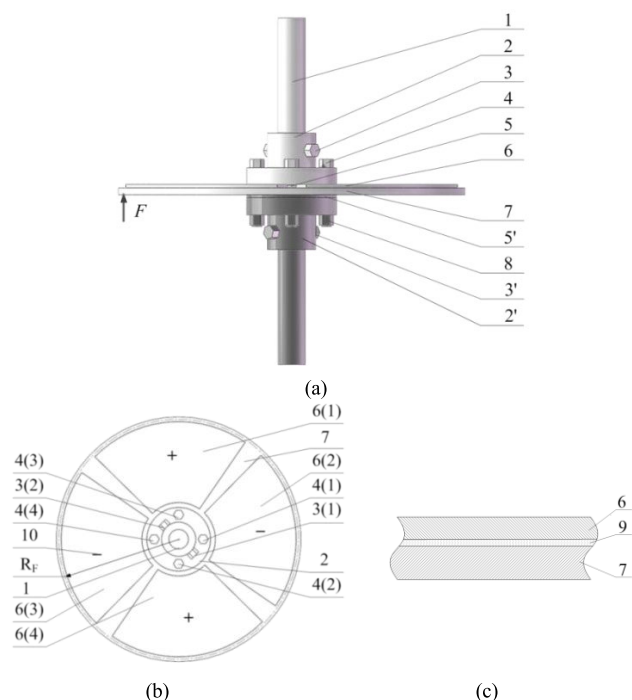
Front view (a), top view (b) and partial-cutaway view (c) of PLAPEH.
